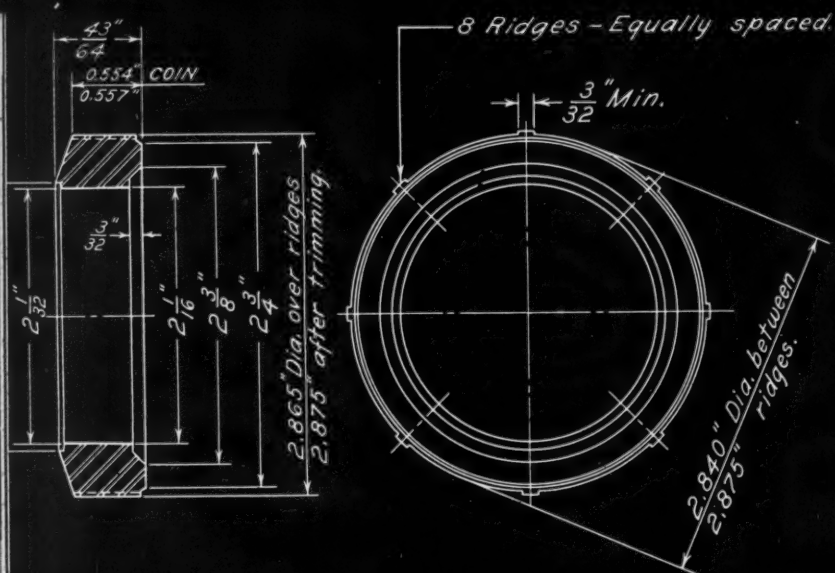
Detailed Dimensions of the Bearing Lock Sleeve which is Formed Directly from Steel Chips
